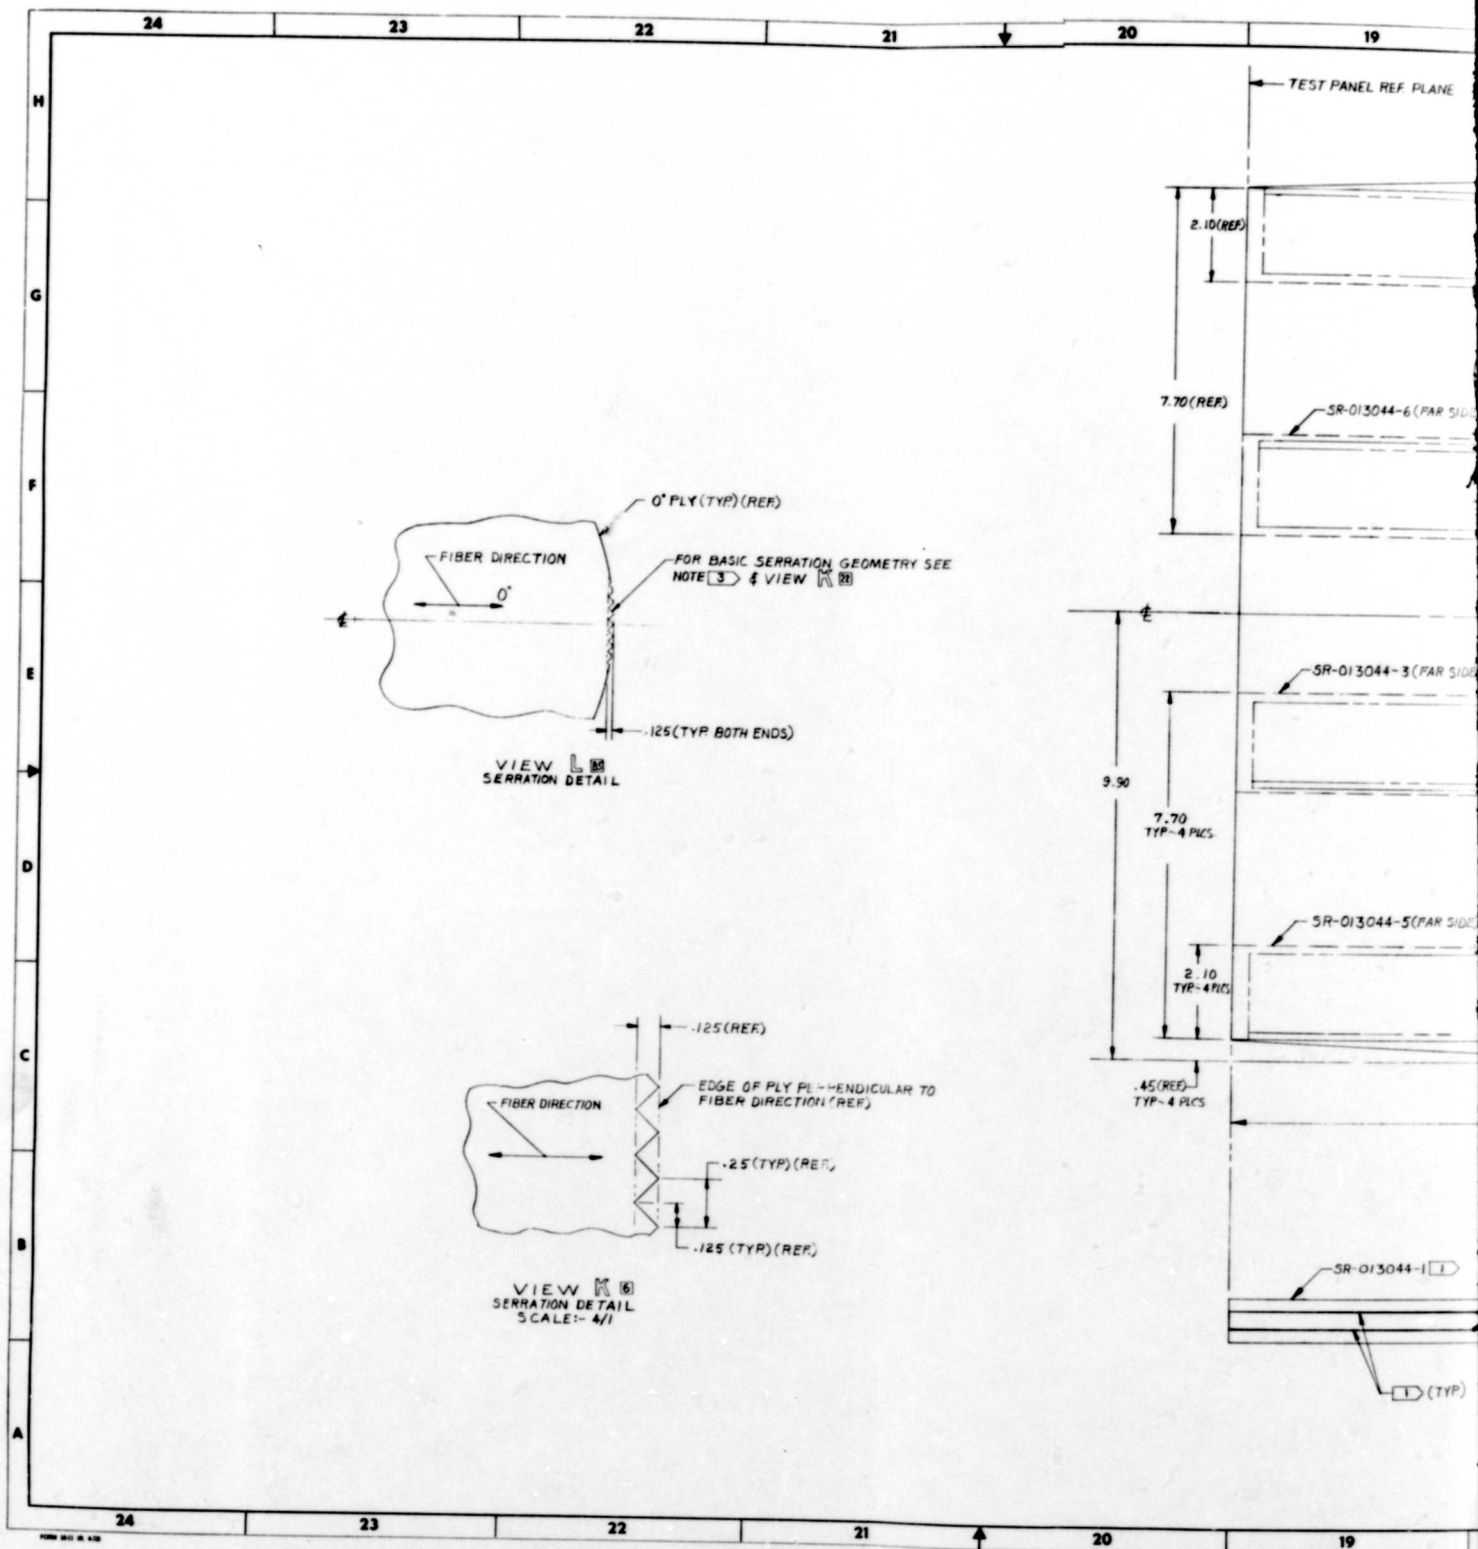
Panel Five Repair Drawing (Sheet 1 of 4)
